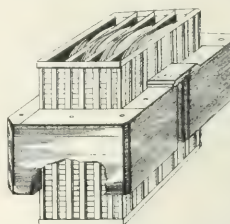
ASSEMBLY OF CORE, COILS AND INSULATING CASING
